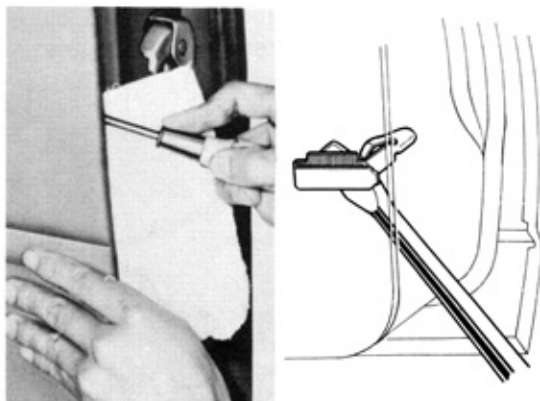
Door Trim Panel Removal B 2370 G 4225
